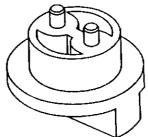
Model VT-1 Wet Valve Tool.
